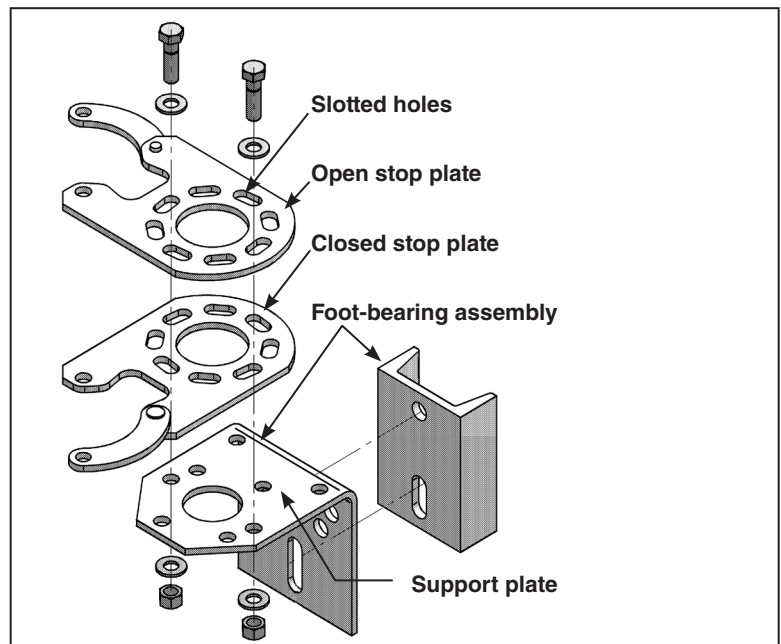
Exploded view of the stop plates and foot-bearing assembly.
